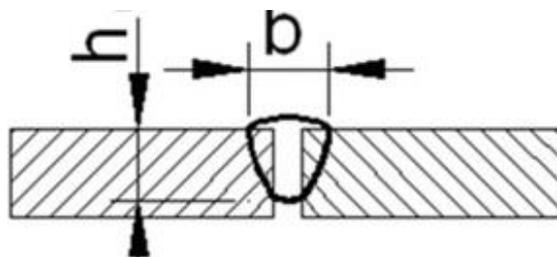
Geometrical characteristics of welding, b -width of welding, h -penetration depth of welding
